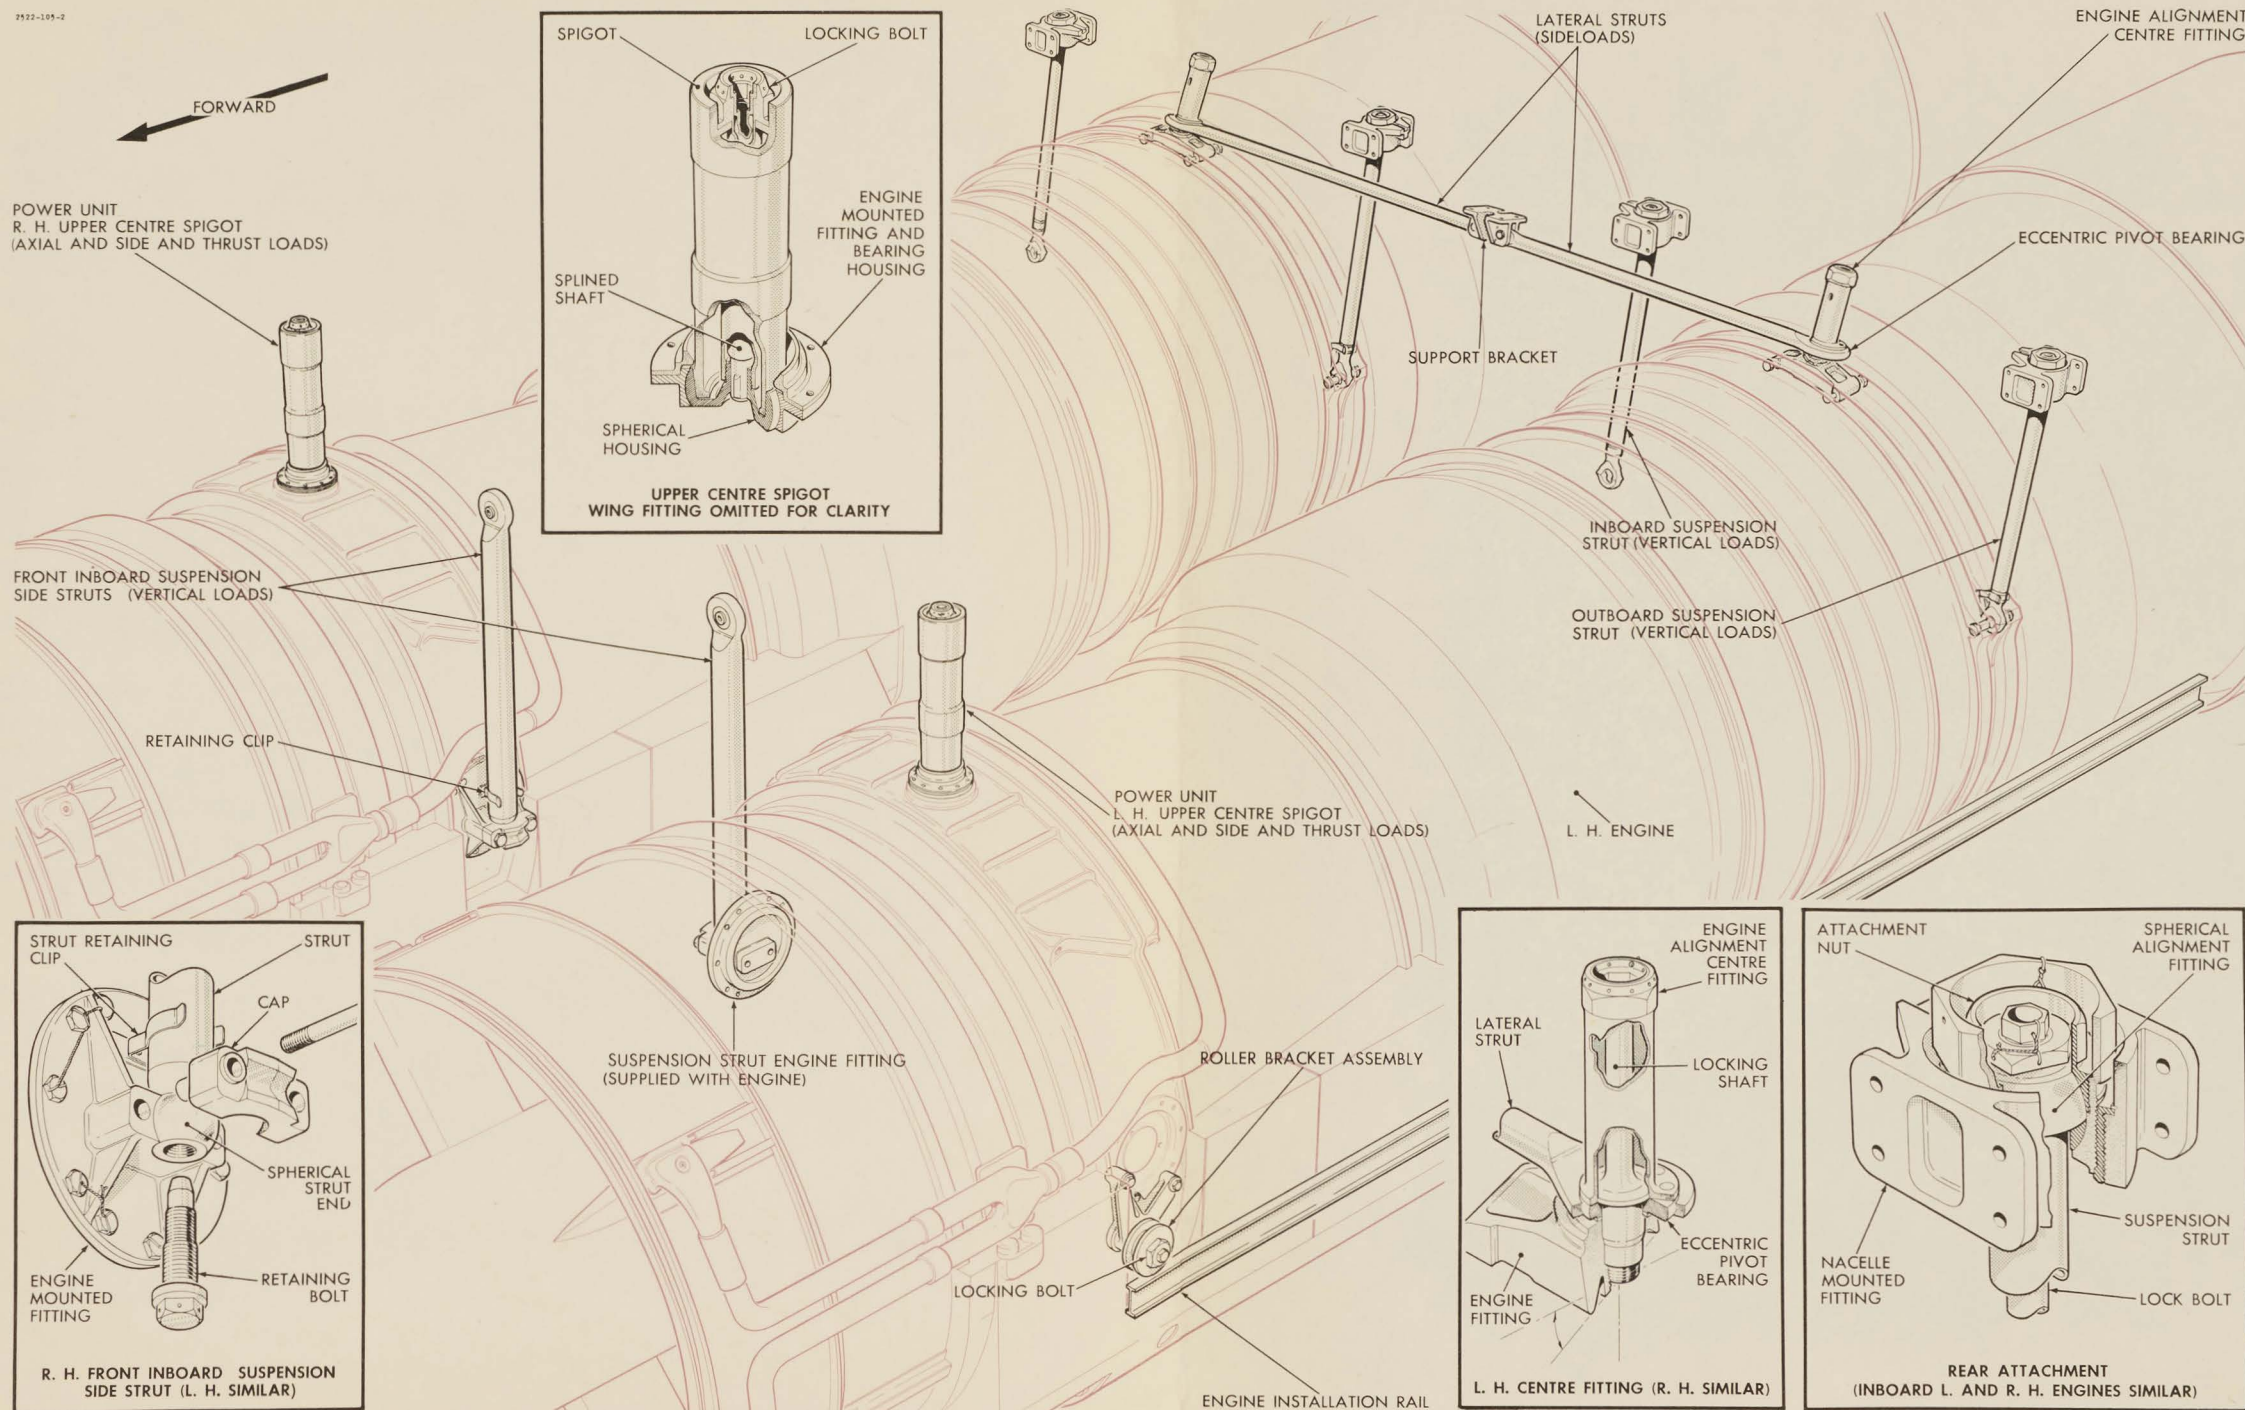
IROQUOIS ENGINE ATTACHMENT AND SUSPENSION
